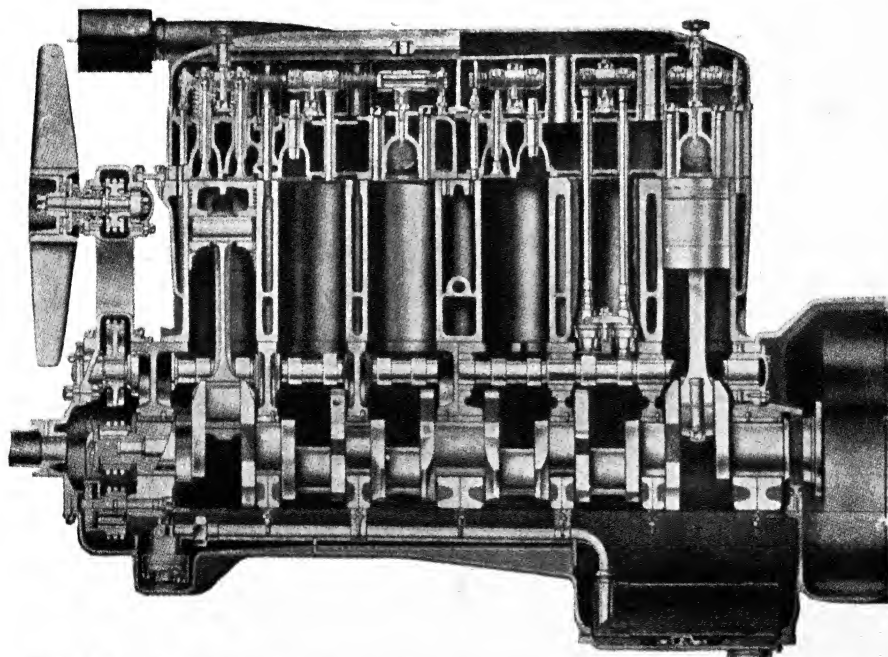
SECTION of the A.E.C. 130 H.P. HIGH SPEED 6-CYLINDER DIESEL ENGINE.
